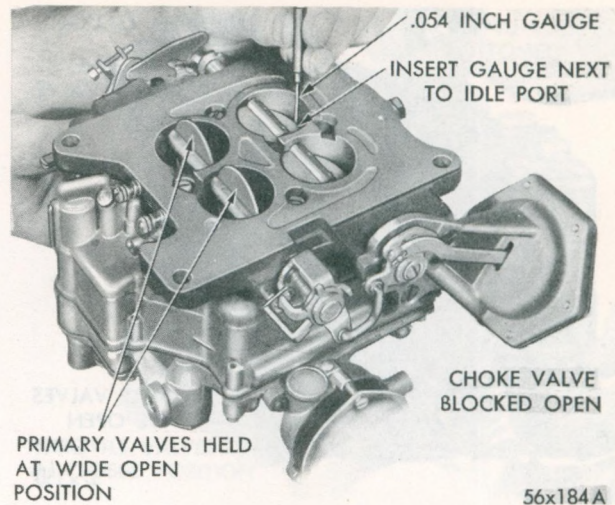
Checking Opening of Secondary Throttle Valves (Step 1)
